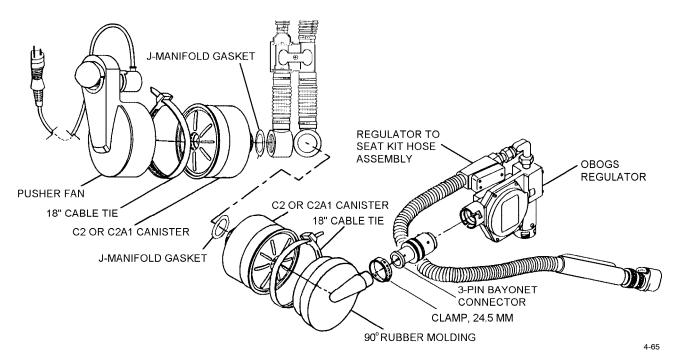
Assembling Pusher Fan and Oxygen Delivery Subassemblies to J-Manifolds - (V)3 Only
